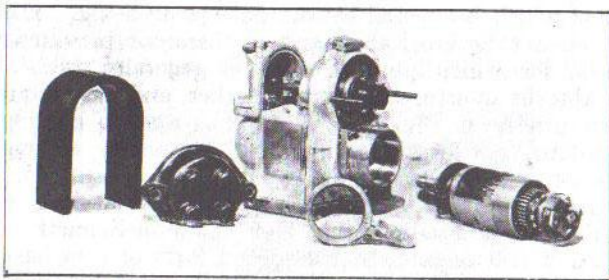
Component Parts of a Thomson-Bennett Magneto ready for Assembling.
